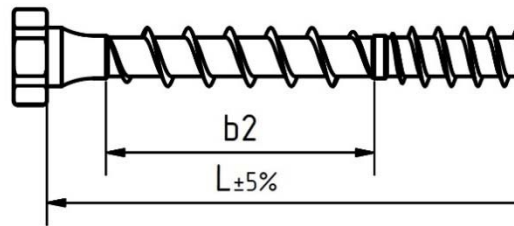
Schmid Schrauben RAPID® T-Con with threaded shaft
